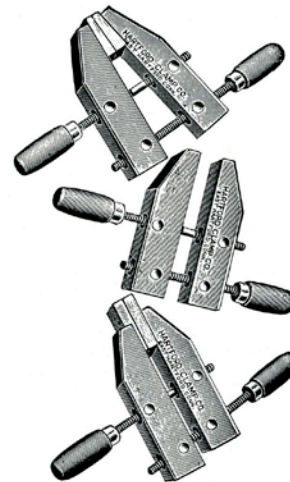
5 Hand Screws, Sometimes Called Hand Clamps
